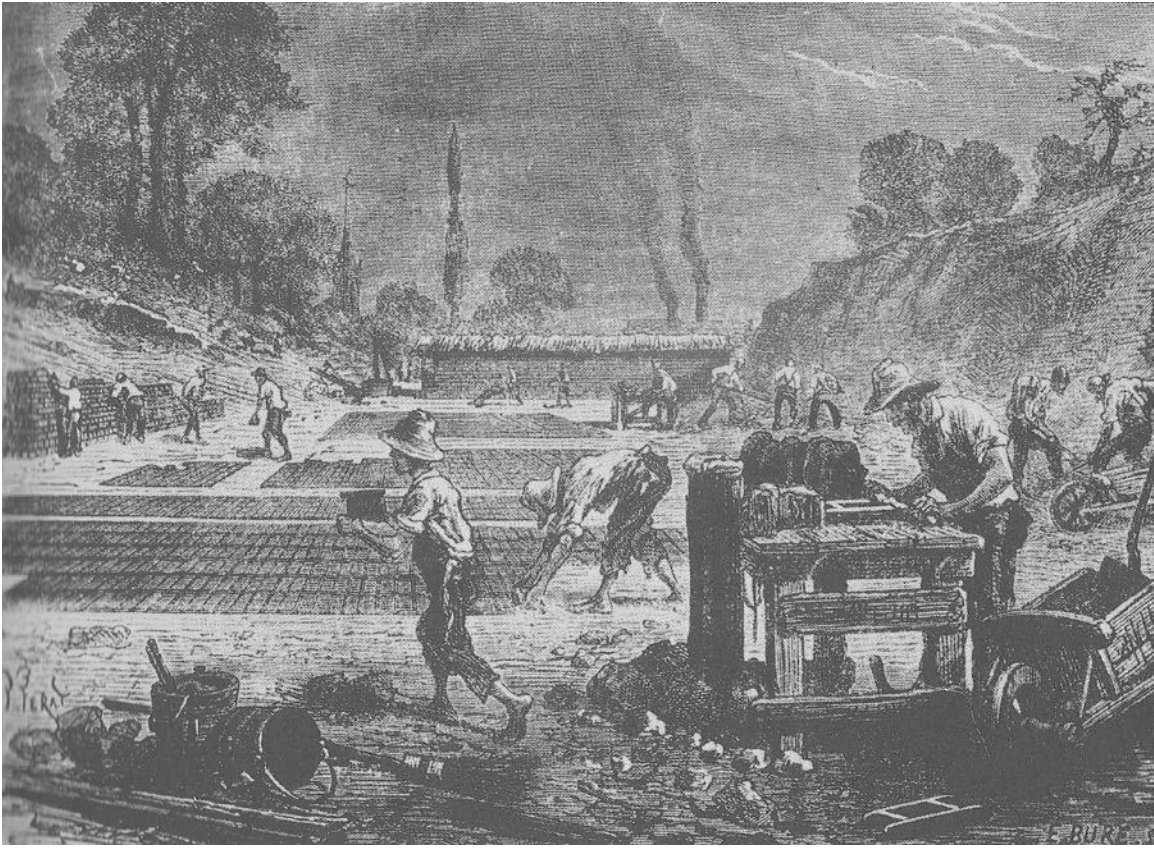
Work Yard (Beall, *Masonry Design and Detailing*, 15).
